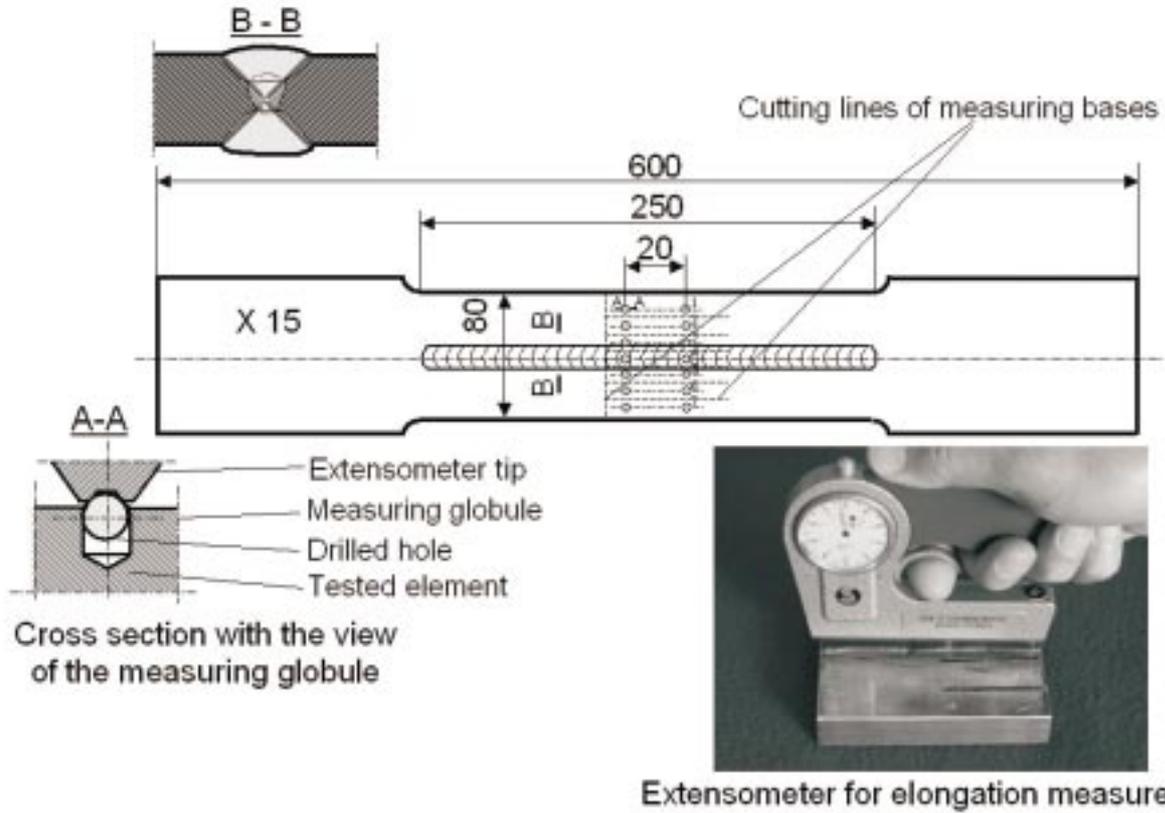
Geometry of welded test plate for tensile testing with bases for welding residual stress measurement and extensometer
